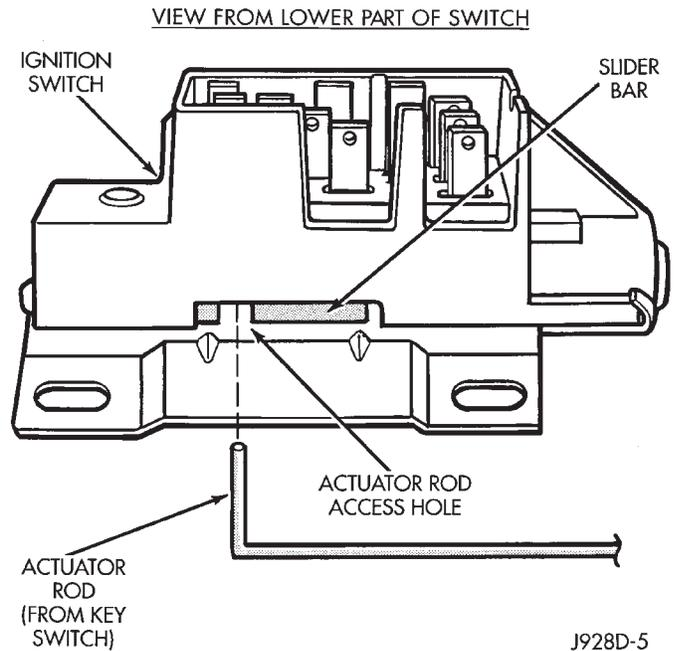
Ignition Switch/Remote Actuator Rod—Typical
